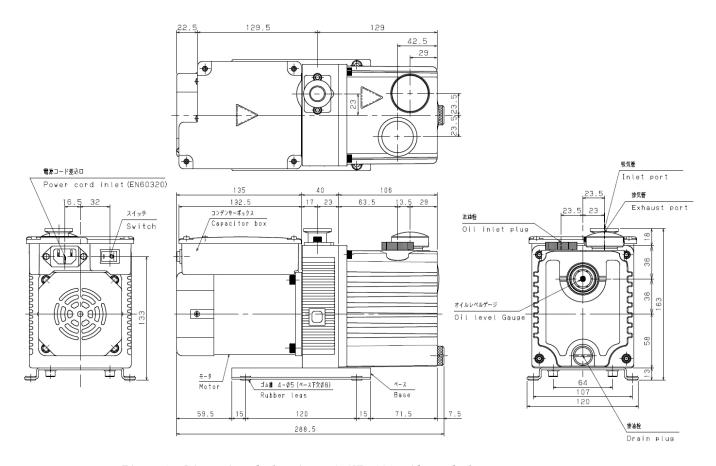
Dimensional drawing of GHD-031 oil sealed rotary vacuum pump.
